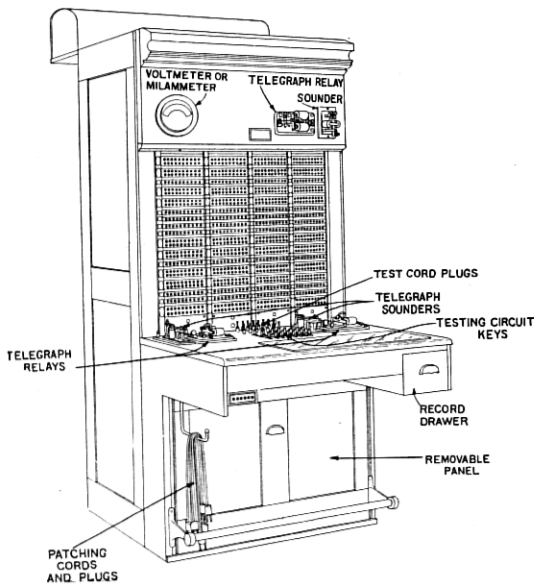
Typical Assembly of Floor-Mounted Test Board—One Position
